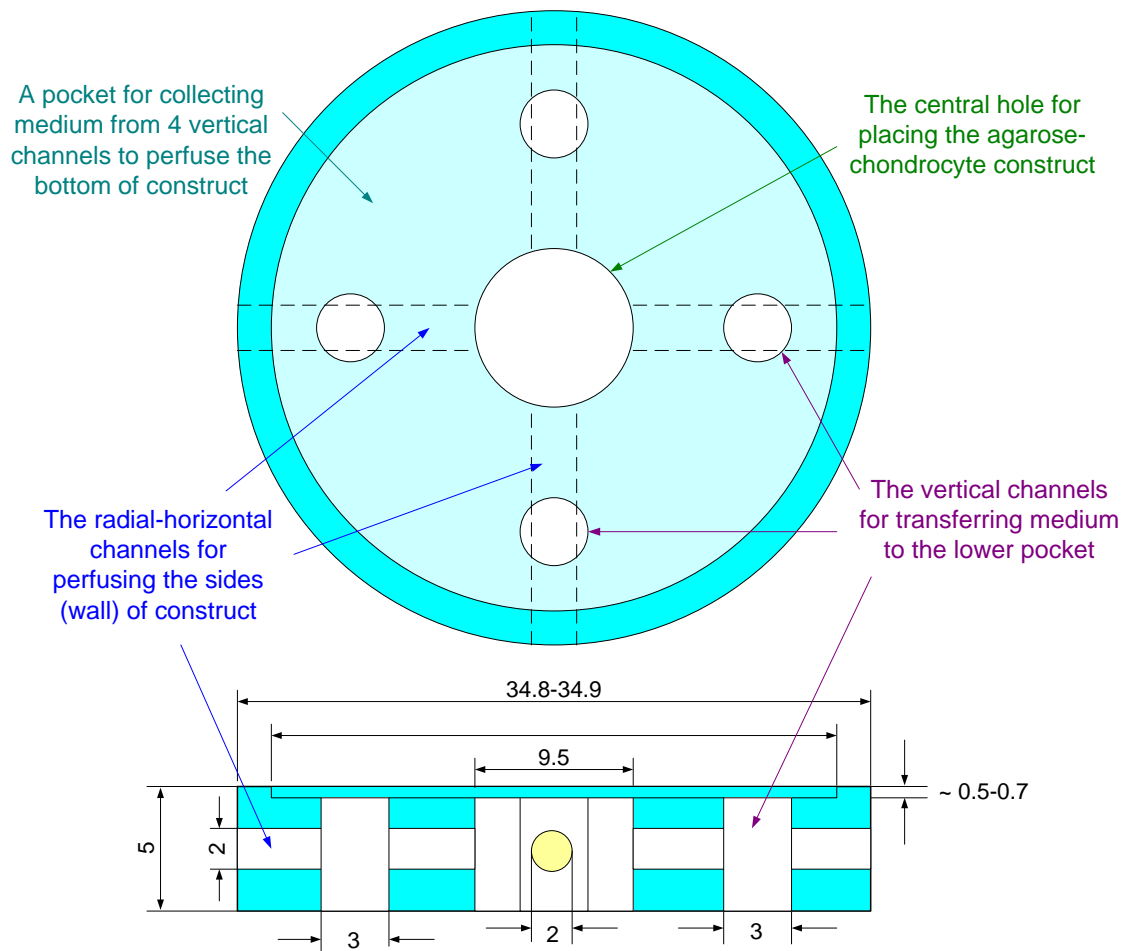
Drawing of bottom view of the designed construct holder with dimensions (mm).
